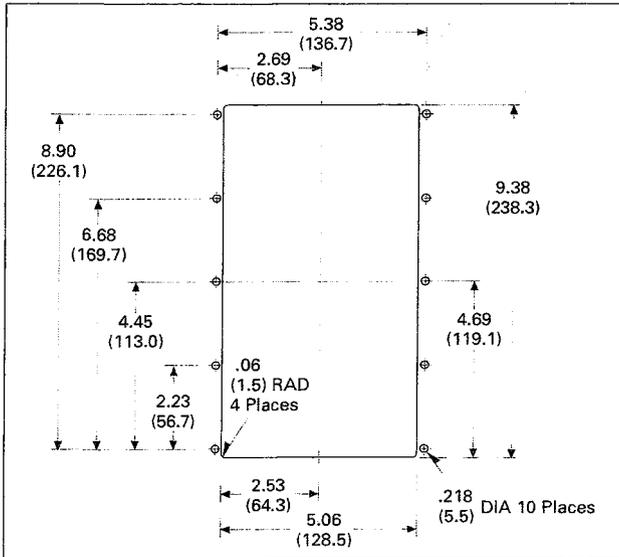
Drilling Pattern — Dimensions in Inches (mm)
